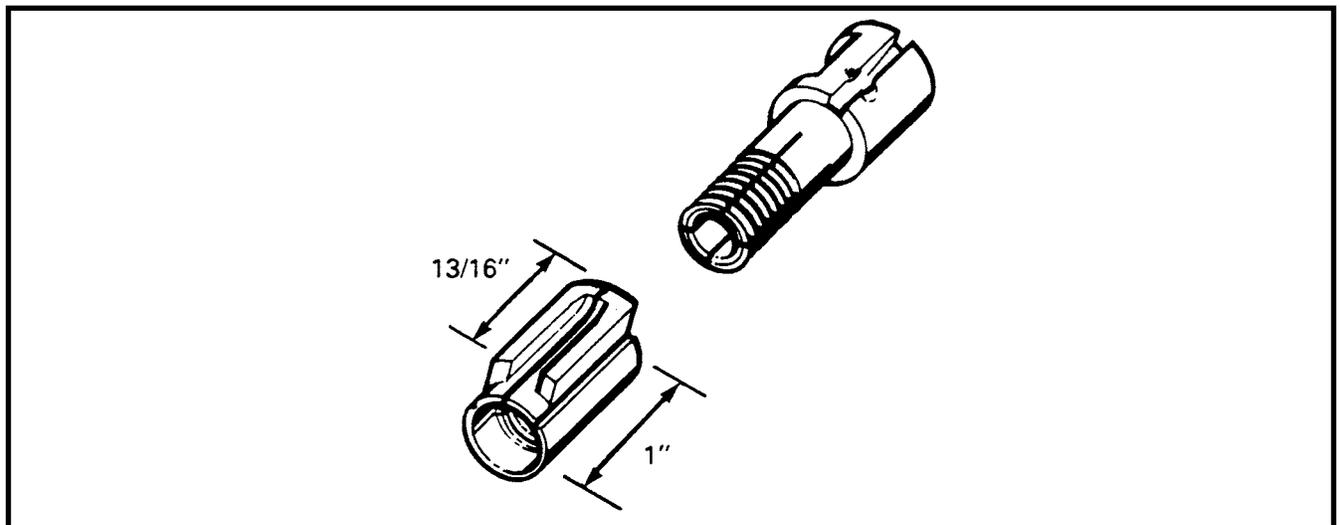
Trigger Guard Collar Adjusting Jig
